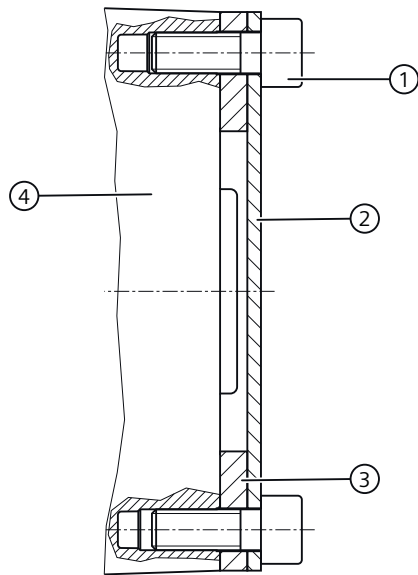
Protective cover for hollow shaft for worm geared motor S
